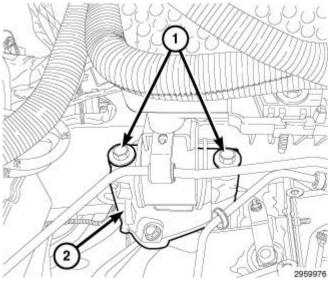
LH Engine (Transmission) Mount Bracket & Bolts Courtesy of CHRYSLER GROUP, LLC
